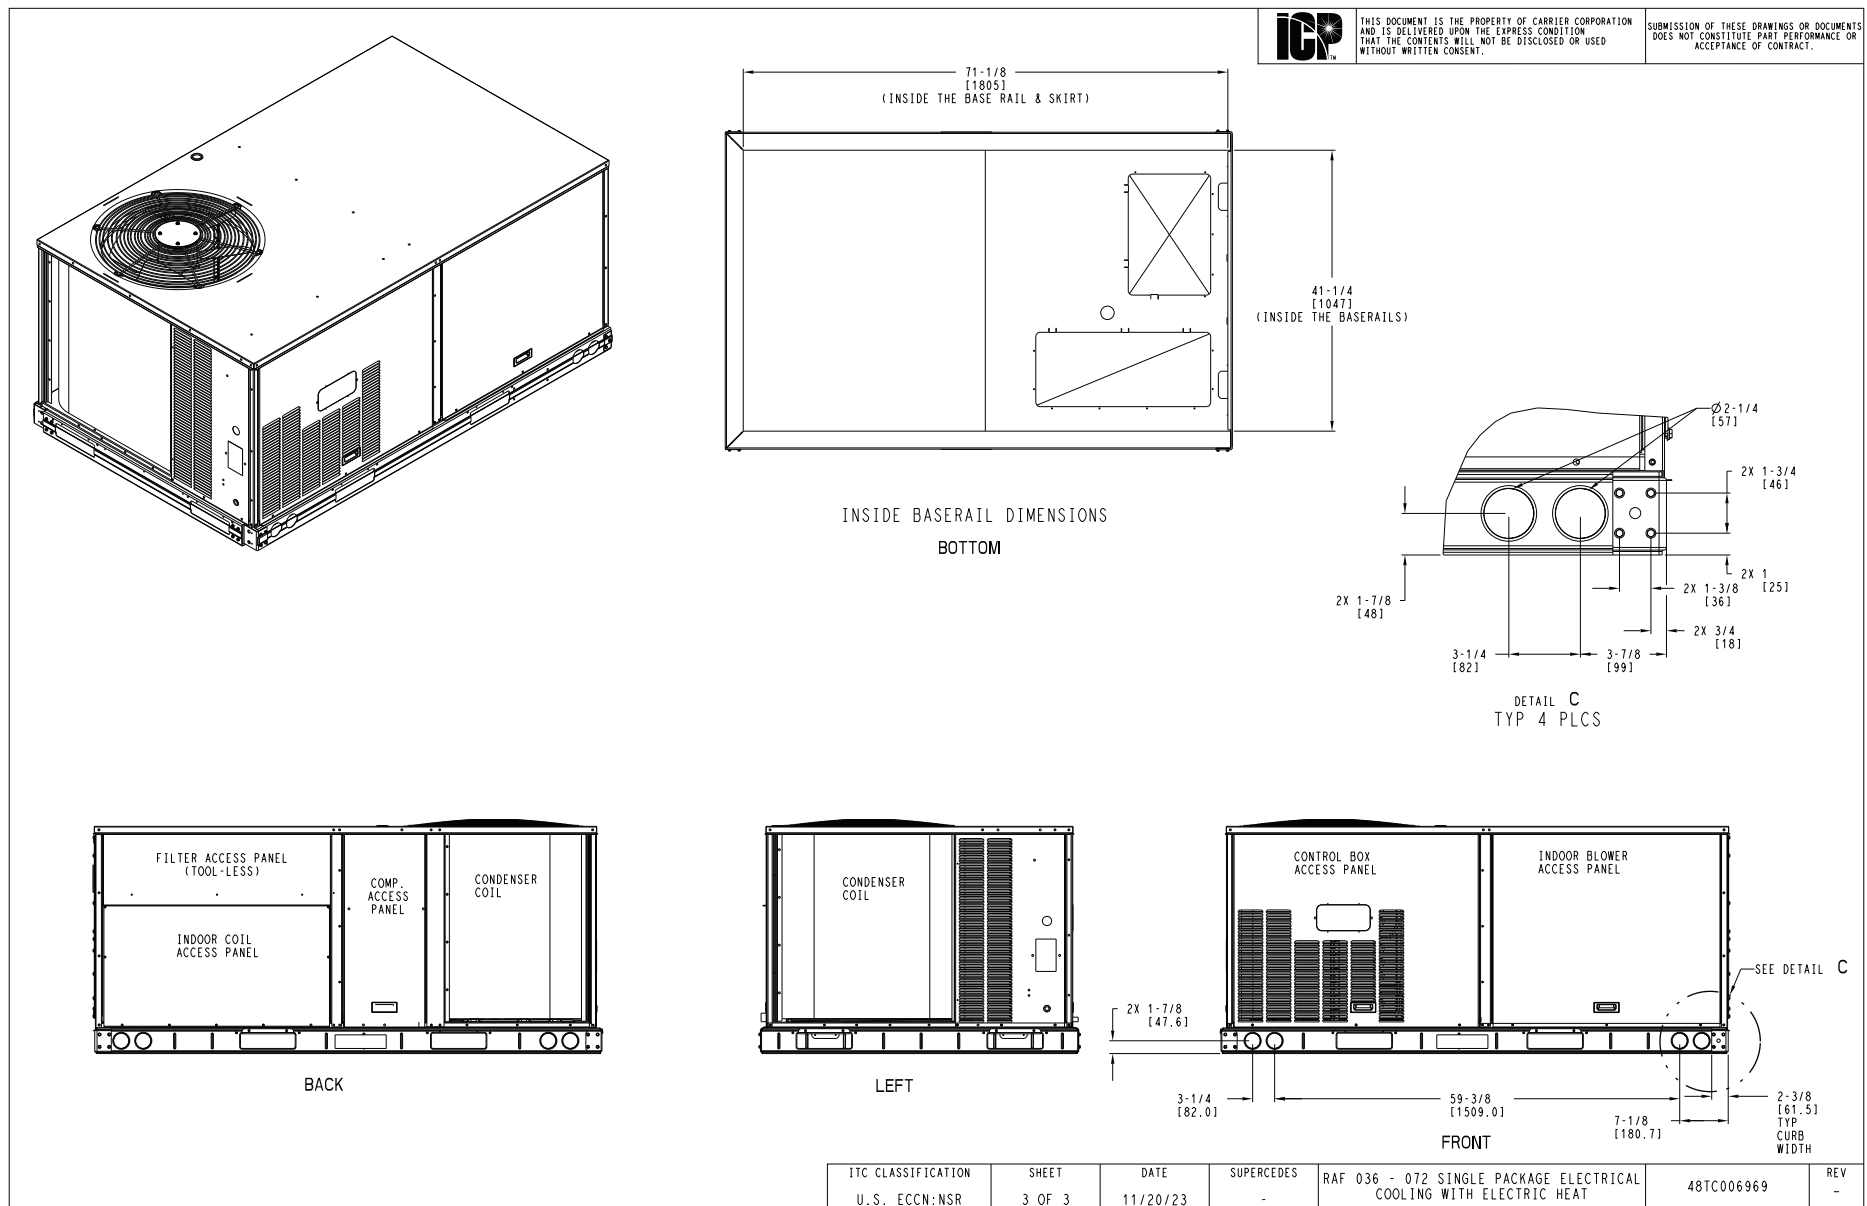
RAF036-072 Unit Dimensional Drawing (cont)
